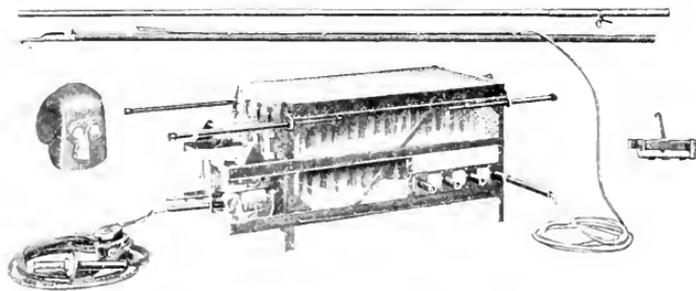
400-630-volt Resistor Arc Welder
